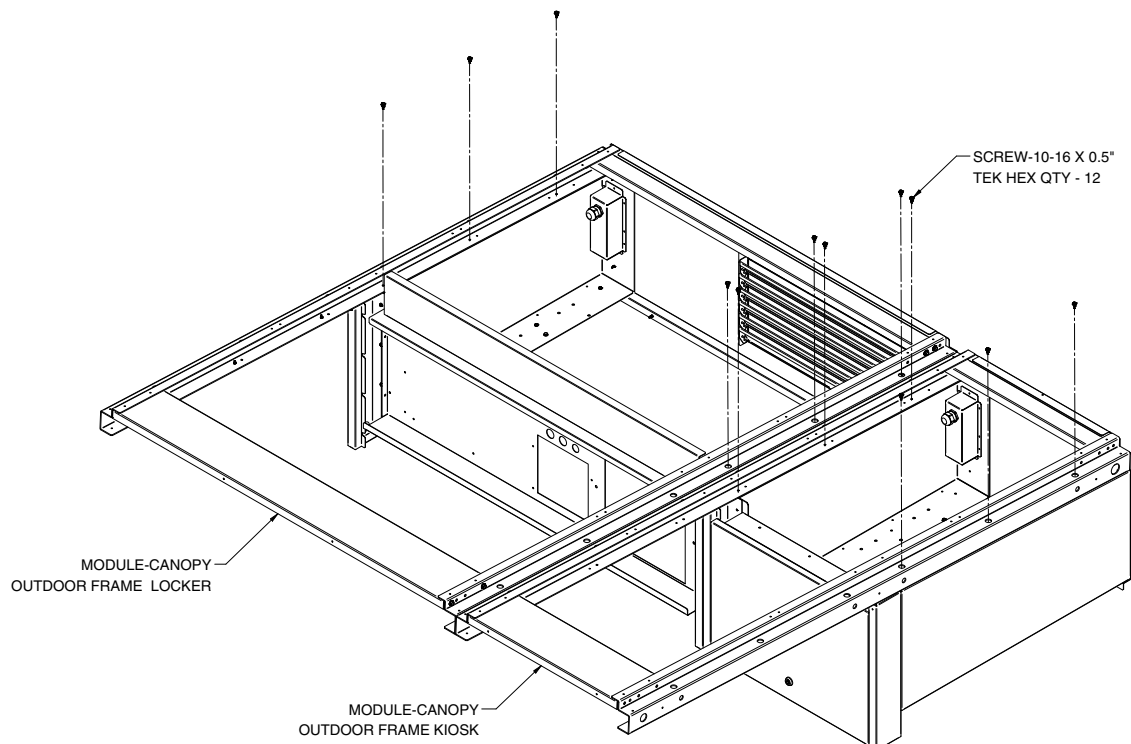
Top View of Canopy Frames attached to Refrigerated Module and Control Kiosk
